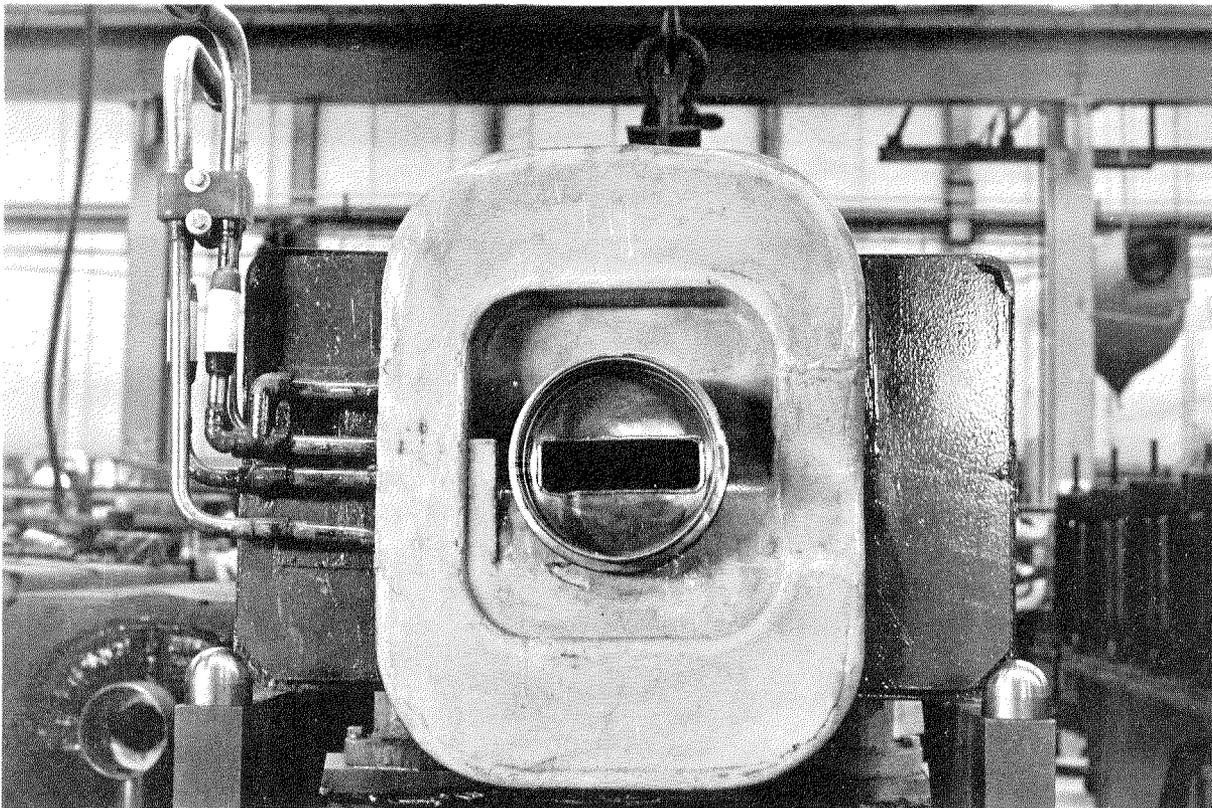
End view of rebuilt magnet using new impregnation and insulating techniques.
